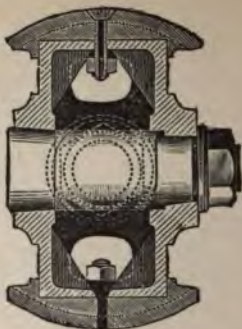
IDE MAIN JOURNAL AND CRANK PIN LUBRICATING DEVICES.
